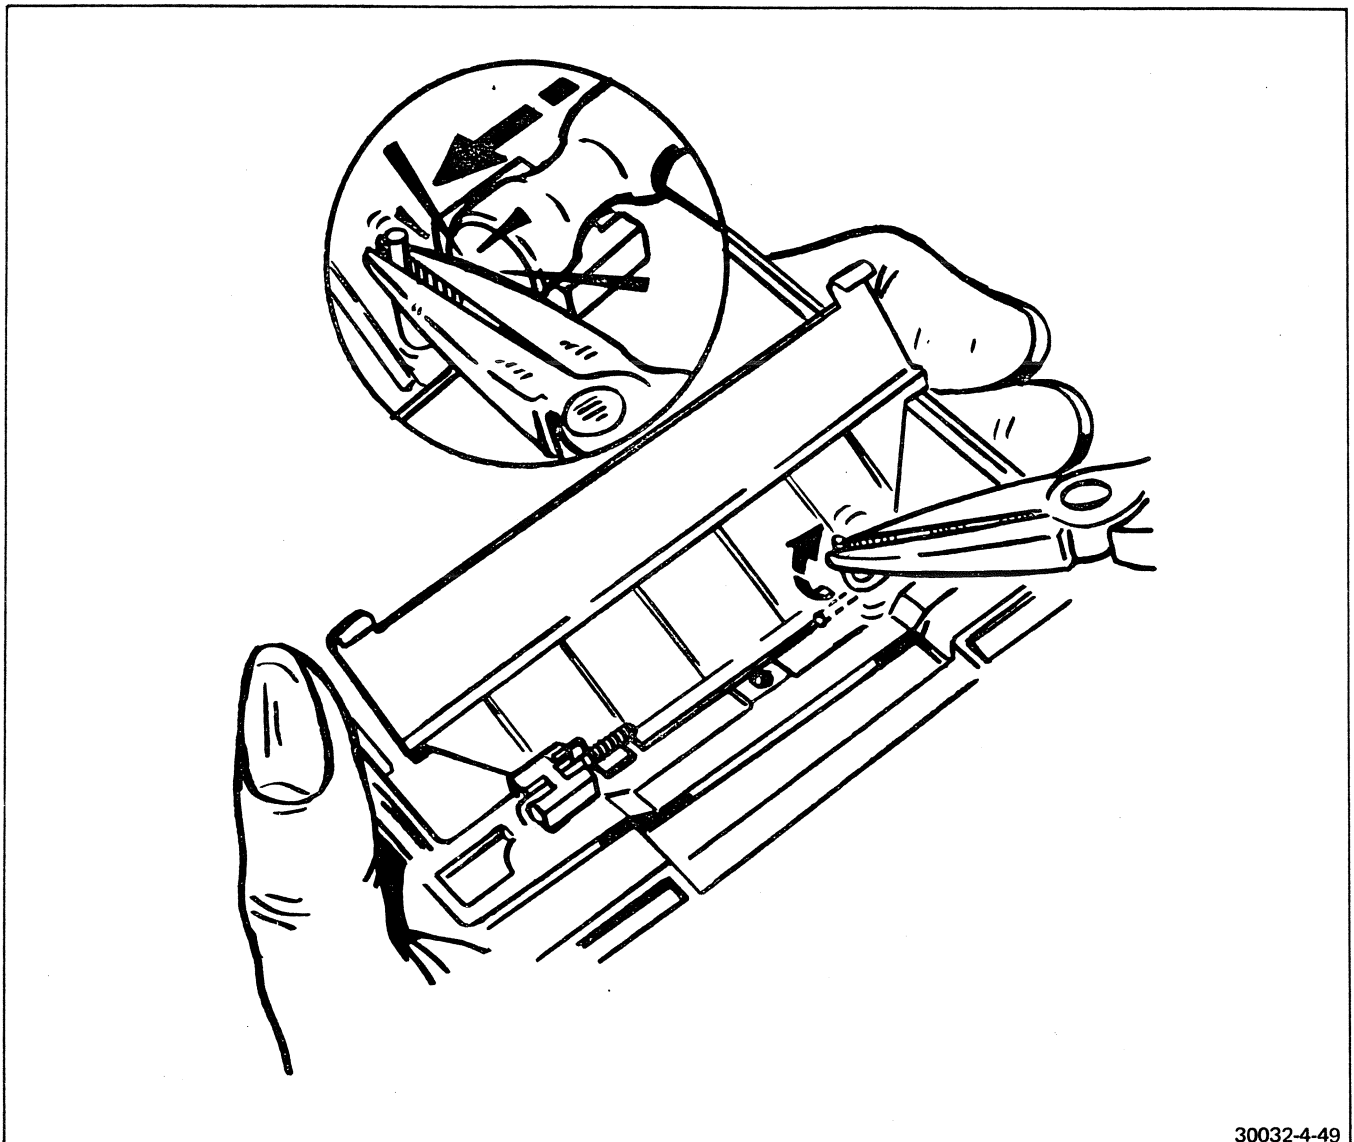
REMOVING LIGHT BAFFLE HINGE PIN
